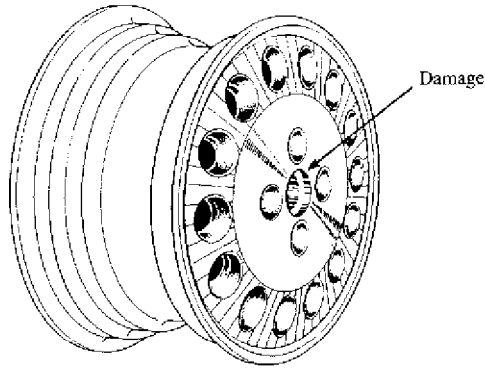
RX7, 626 & GLC Aluminum Wheel
